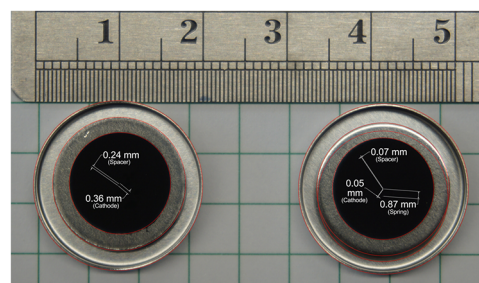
Representative bottom assemblies after assisted alignment using the alignment tool with adhesive (Left) and without adhesive (Right). The distance between the parallel lines corresponds to the deviation of the component center point to the center point of the cathode case.
